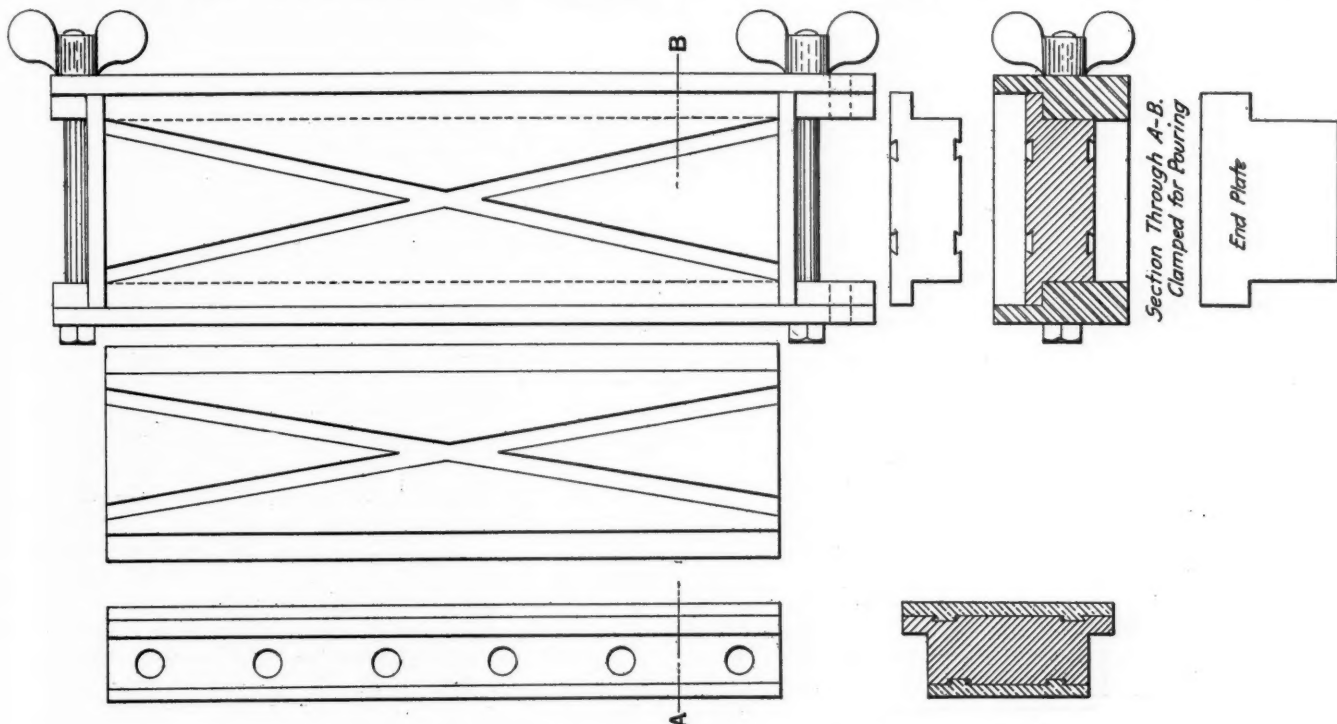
Clamp Used for Casting Brass Liner on Crosshead Gib.
